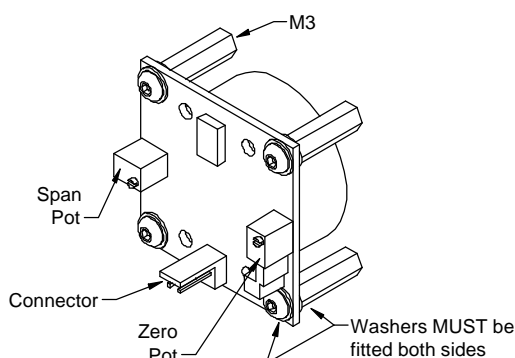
Mounting pillar configuration for attaching to the lid of an enclosure.
